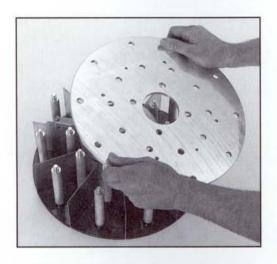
Now lift the Plug Plate, exposing the Divider Blade Assembly . . .
